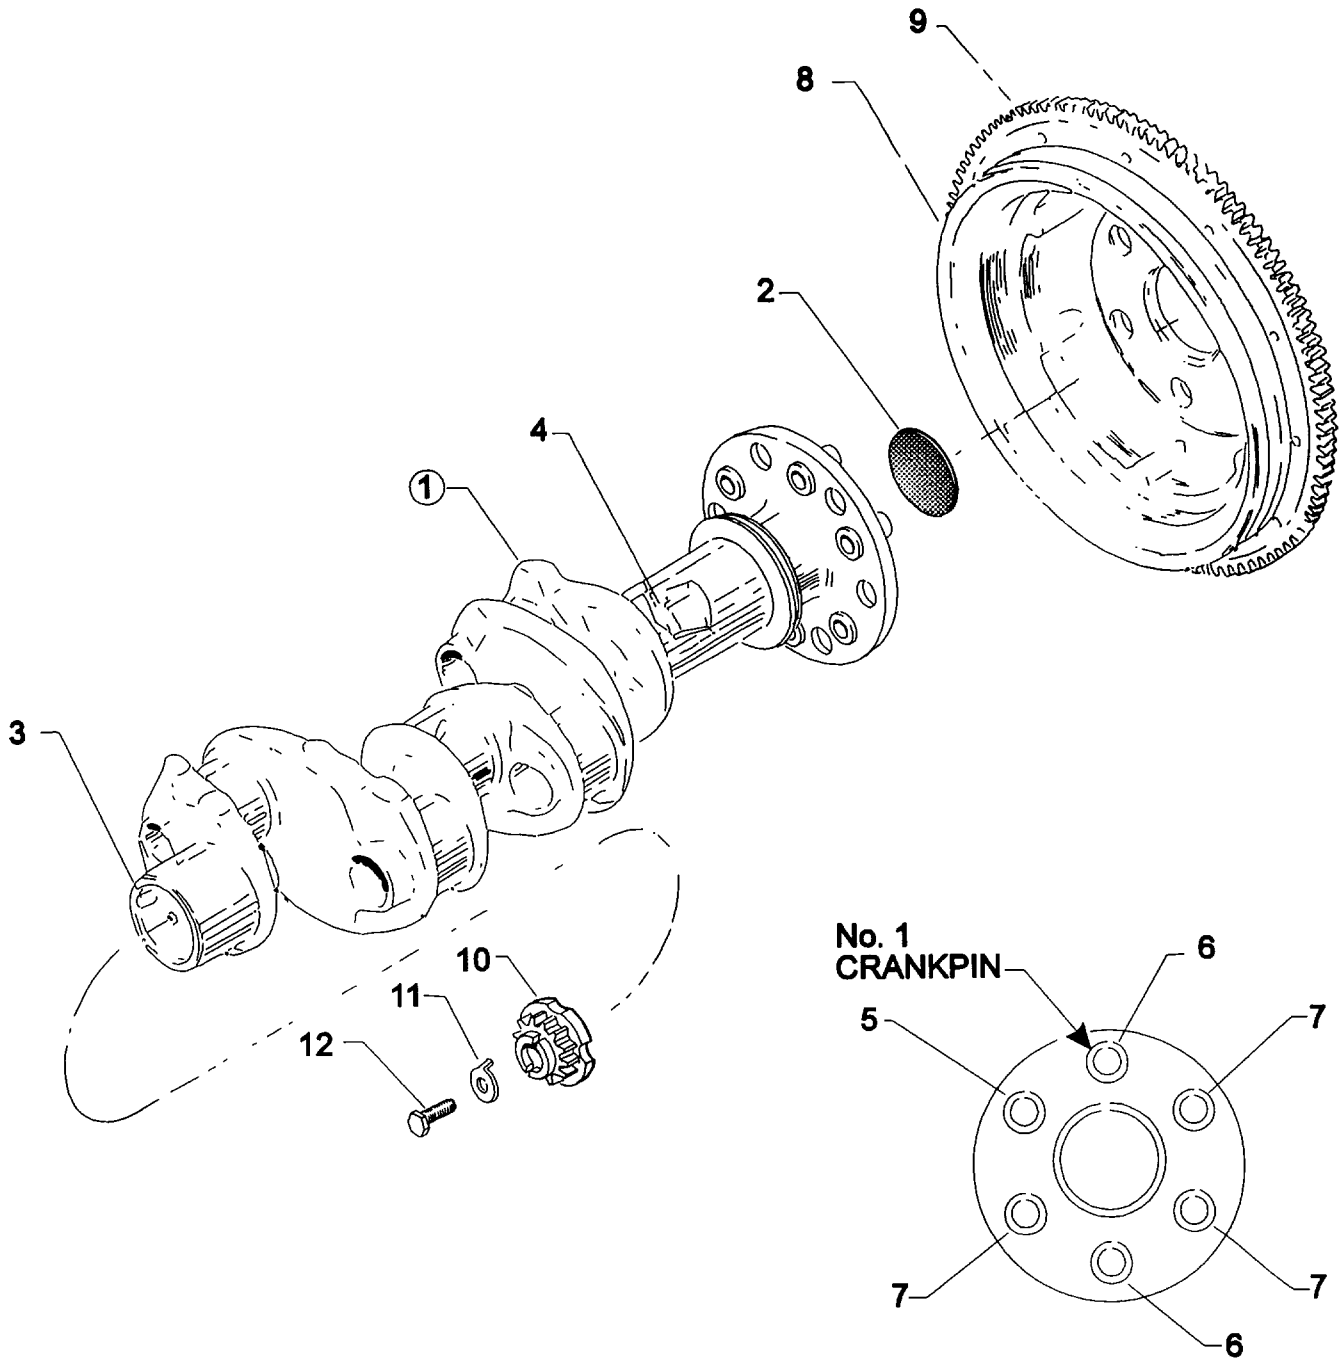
CRANKSHAFT ASSEMBLY AND RELATED PARTS
